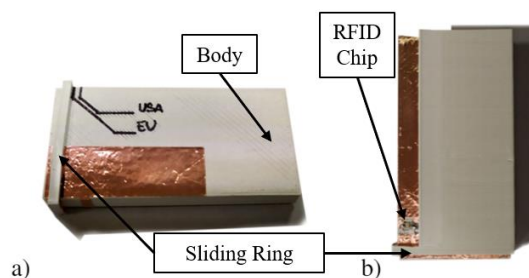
Top (a) and bottom (b) view of the realized prototype.
